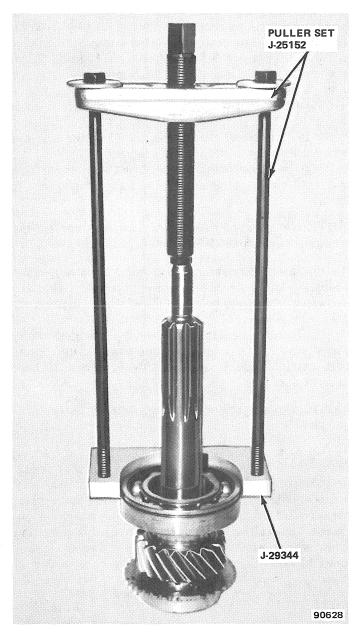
B-29 Removing Front Bearing from Clutch Shaft
